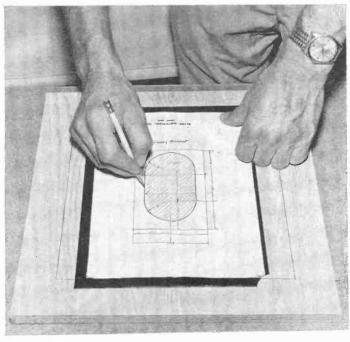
Provided with crossover network is template that determines dimensions of cutout on bottom of enclosure. Use carbon paper to transfer dimensions to bottom plate.
